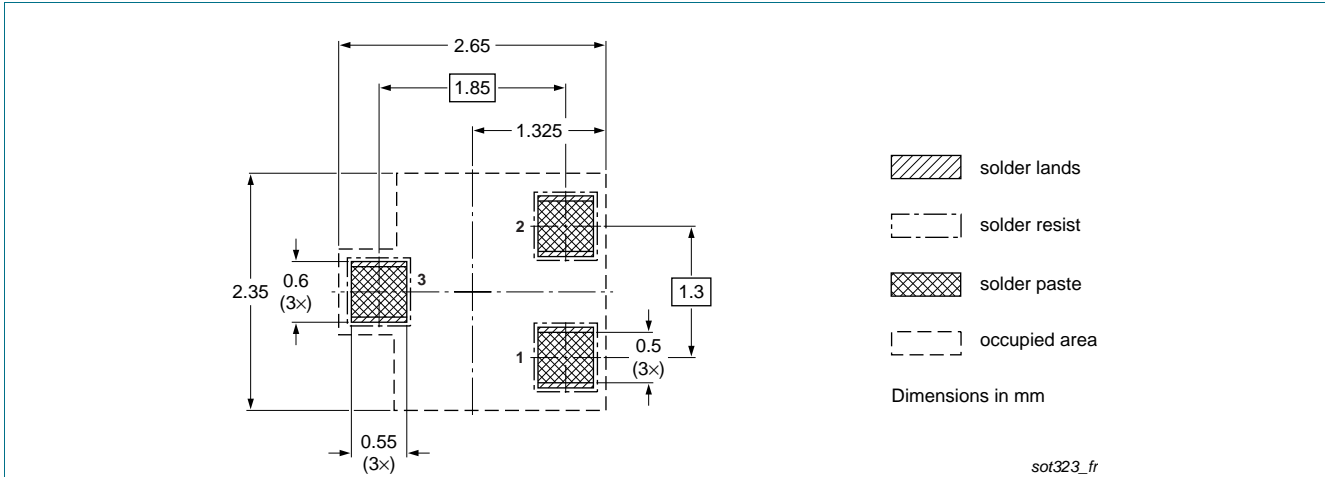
Reflow soldering footprint for SOT323 (SC-70)
